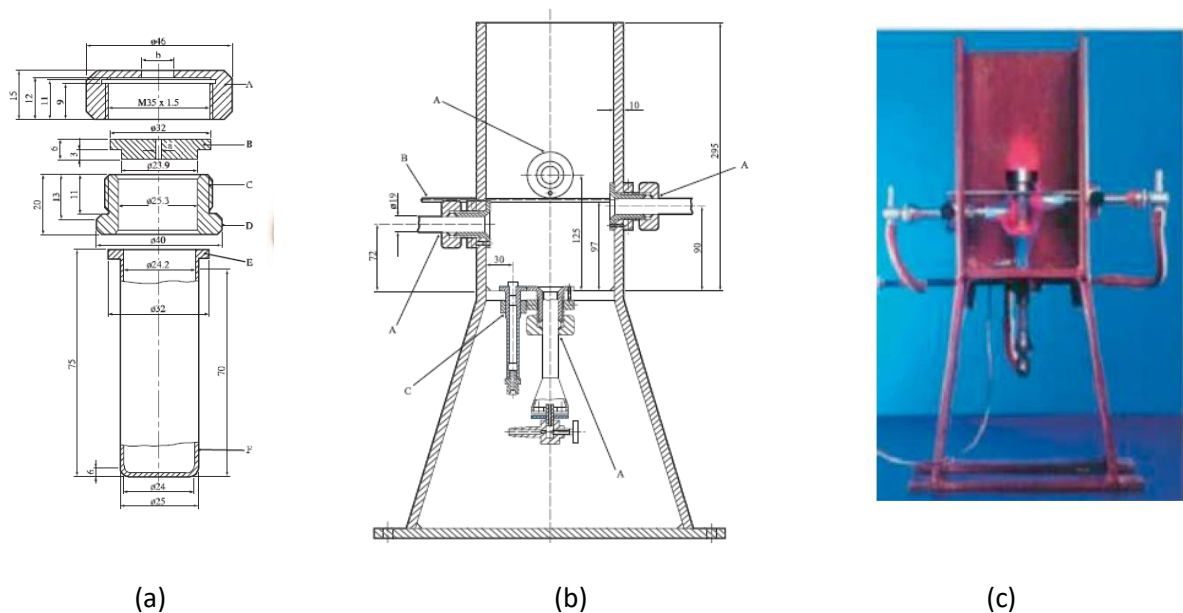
Koenen Test Apparatus⁵ showing the tube and assembly (a); heating assembly (b); and the test underway (c).
